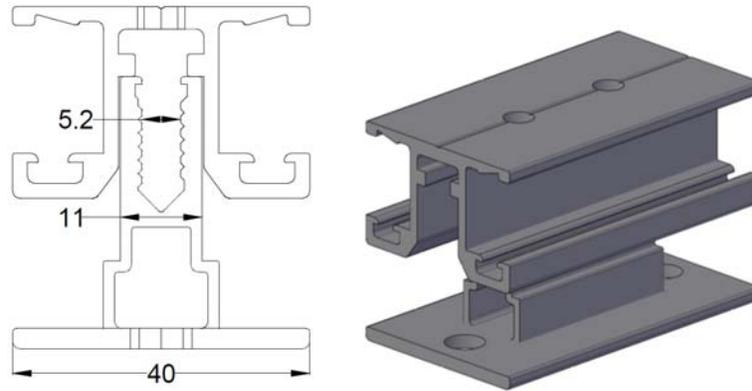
Cross-section and 3D view of SB-6.3 specimen.
